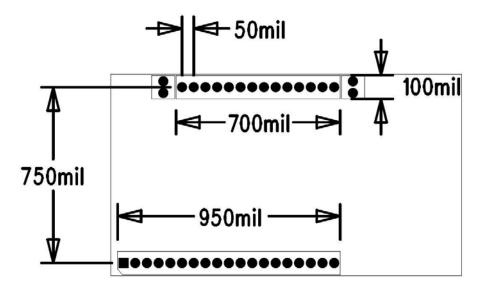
Board-to-Board Connector Dimensions for the EM35xx Module
